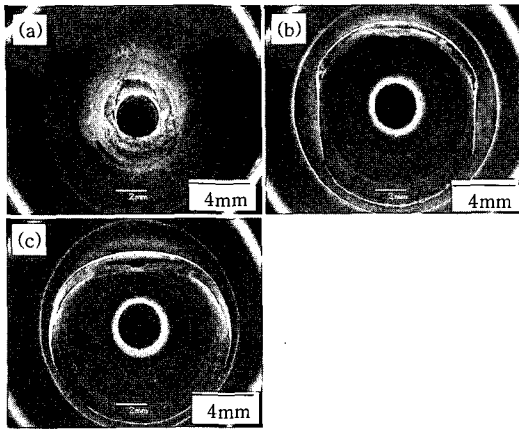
Low magnification SEM images of fracture surfaces of bottom plate with tool insertion depth: (a) 1.45, (b) 1.60 and (c) 1.65mm
